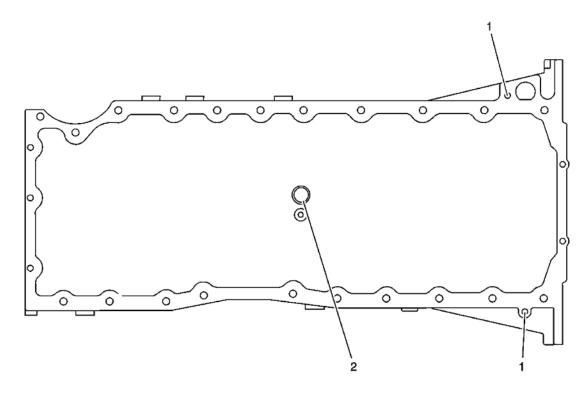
Oil Pan Thread Repair - Top View Courtesy of GENERAL MOTORS CORP.
